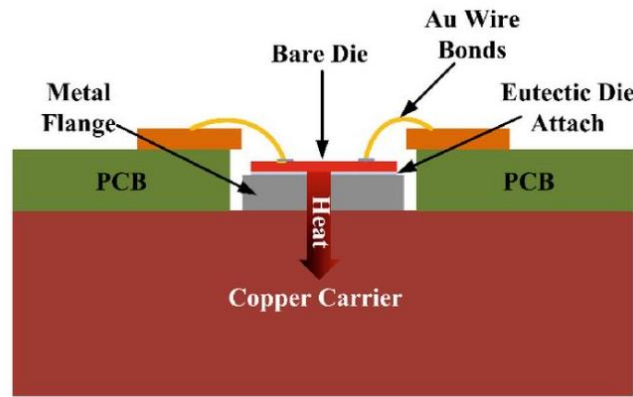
PCB Connection of Packaged Transistor Die [1]
